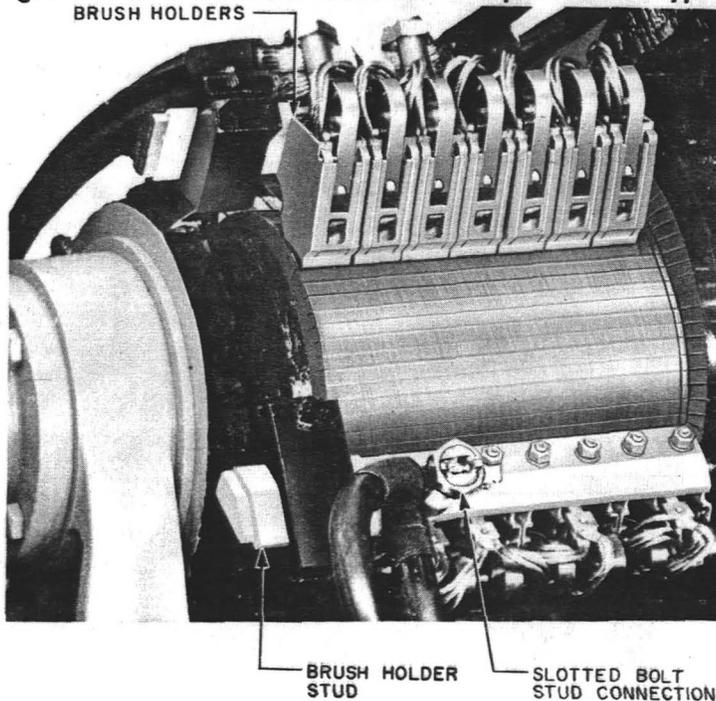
KS-5123-05 Generator — Pedestal-Type With Constant-Pressure Brush Holders Shown
